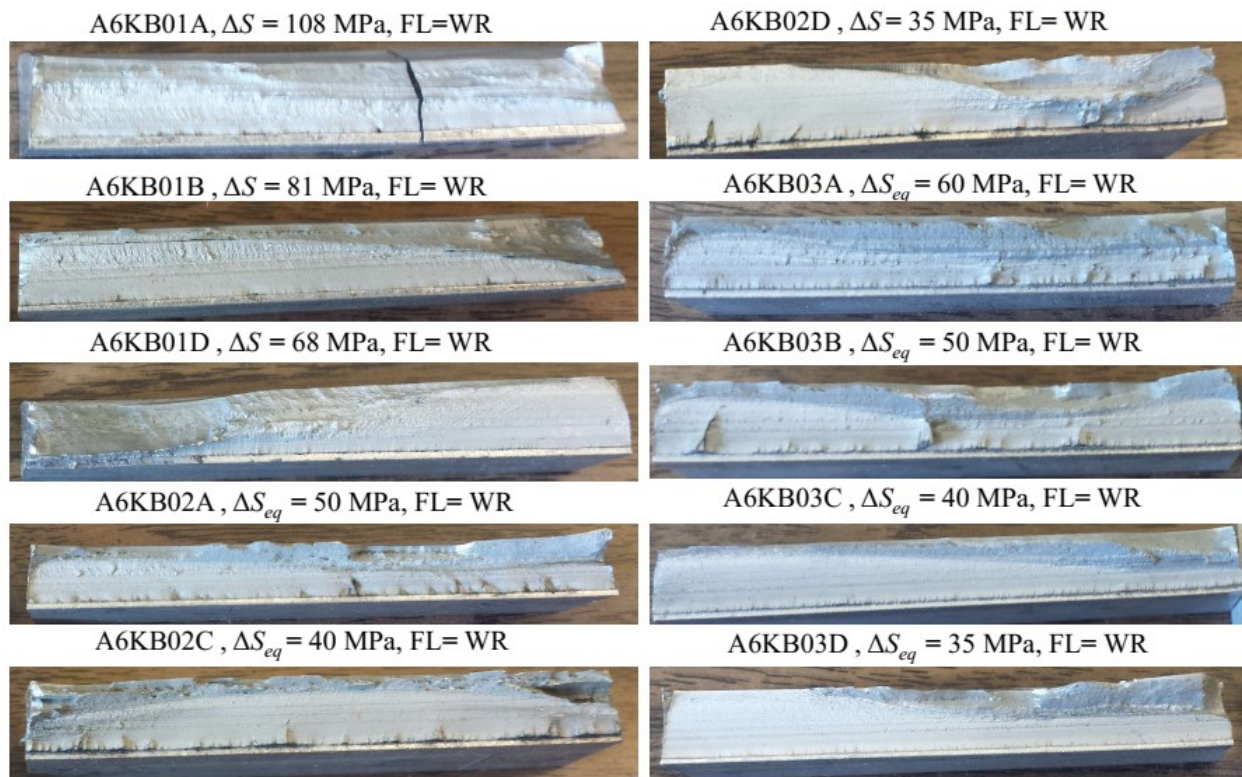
Fracture surfaces of the specimens with kissing bond defect
